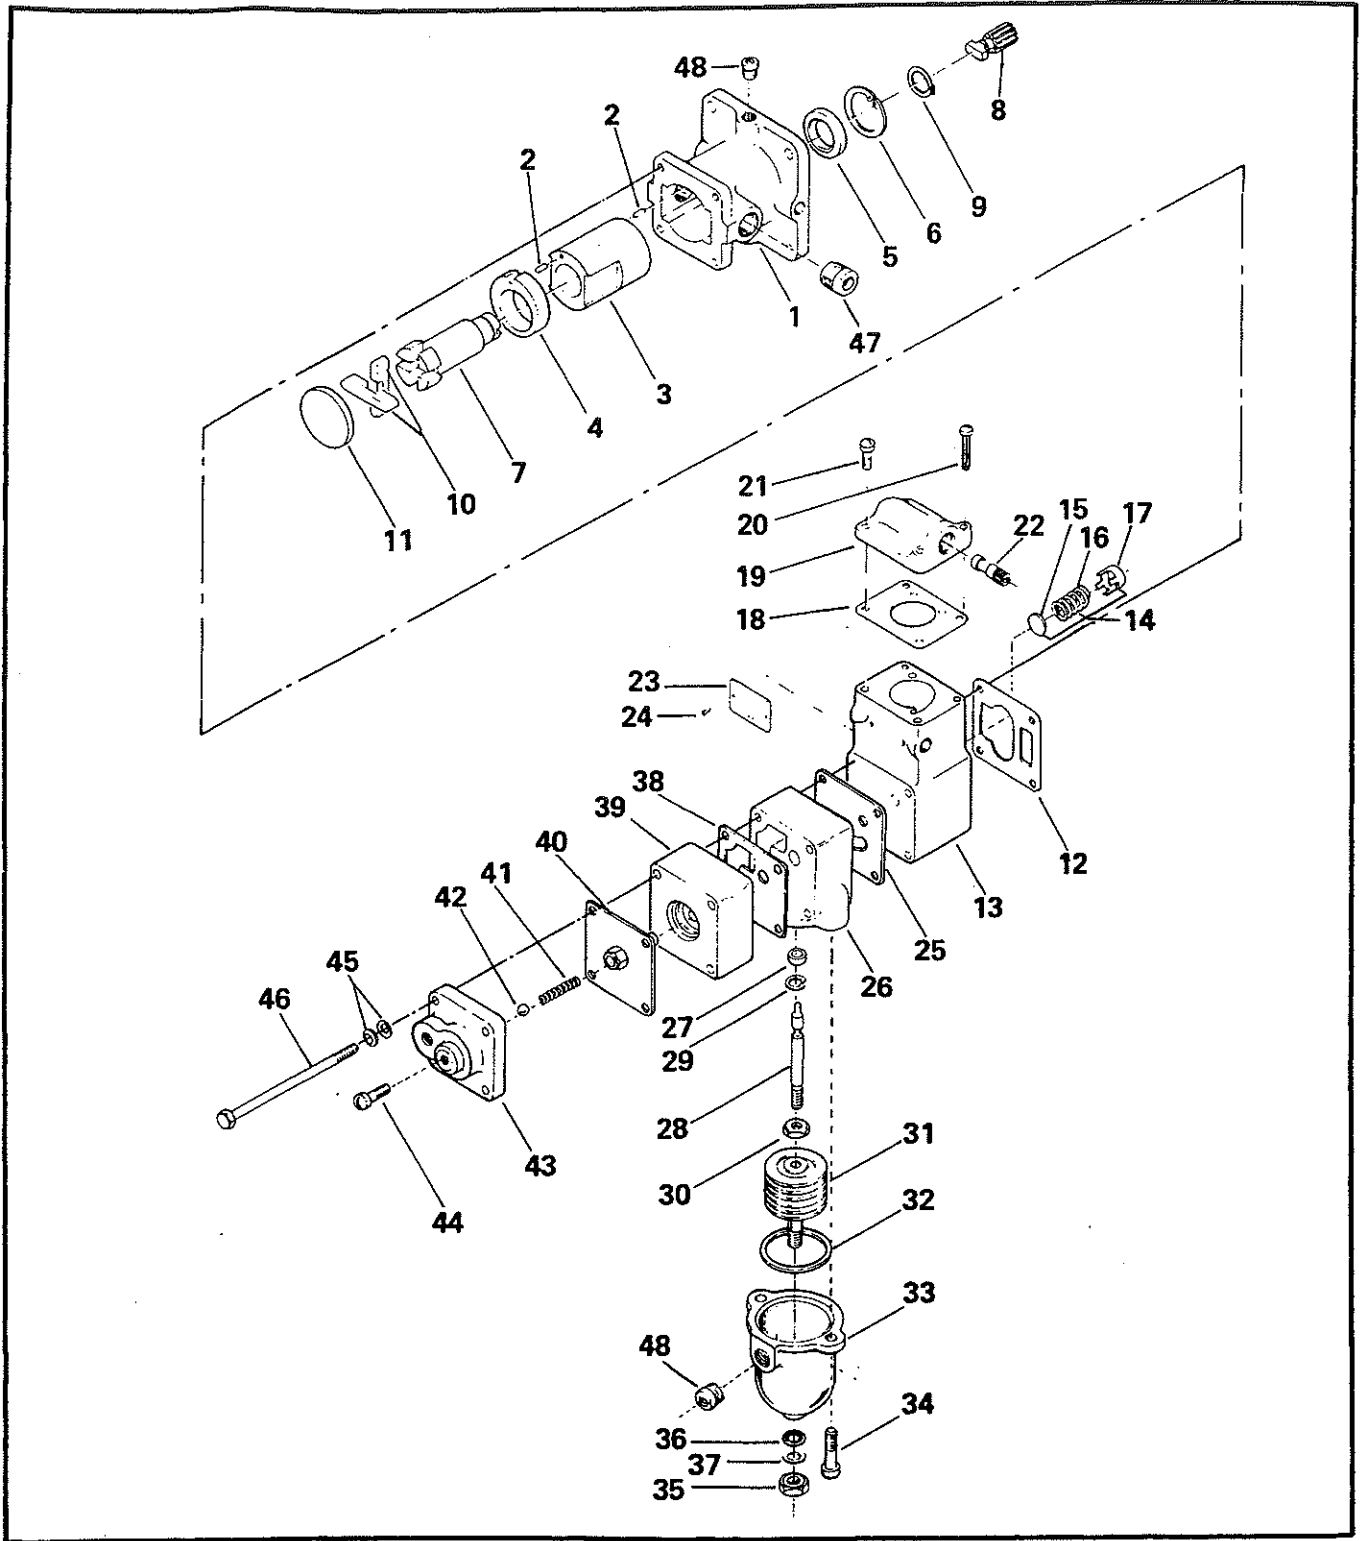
FUEL PUMP ASSEMBLY.
